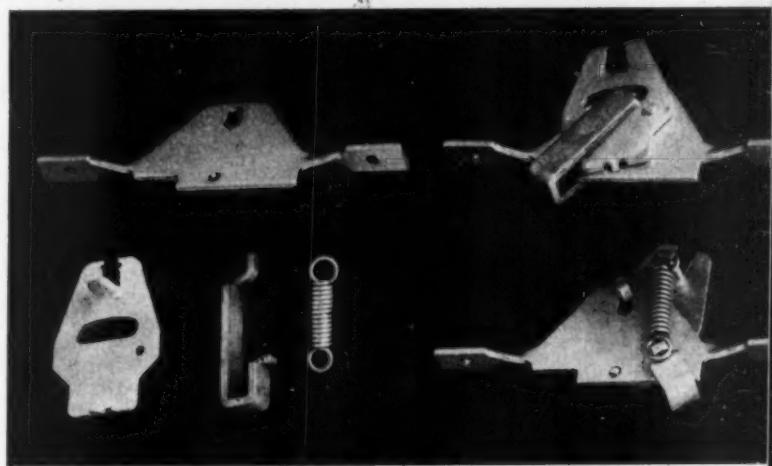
Below—Comparison of cold-molded base with parts required for the preproduction fabricated base. Cost of molded base is actually less than that of a milled runner
